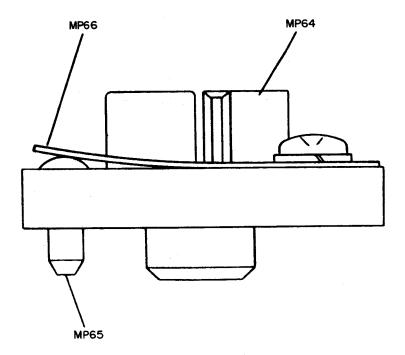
Top Coupling Assembly A2A4MP62 and A2A4MP63, Component Locations
